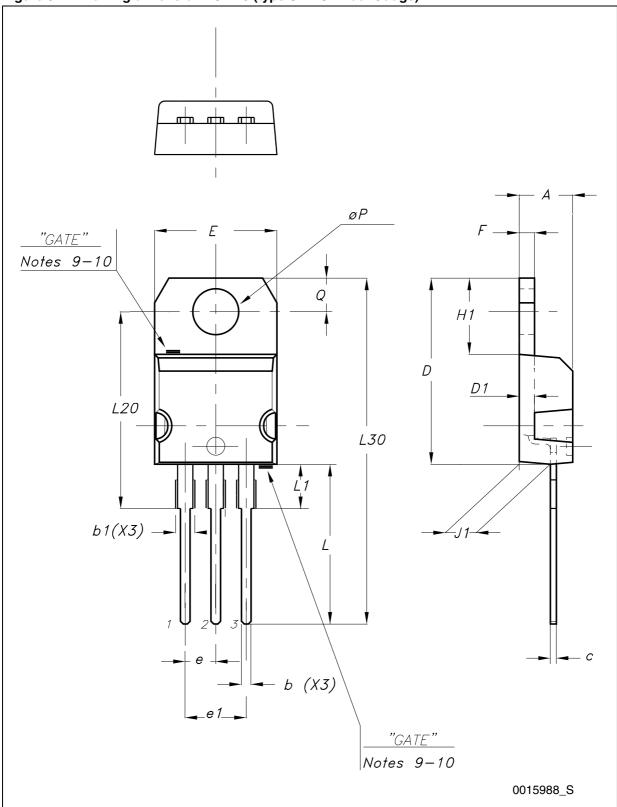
Drawing dimension TO-220 (type STD-ST Dual Gauge)
